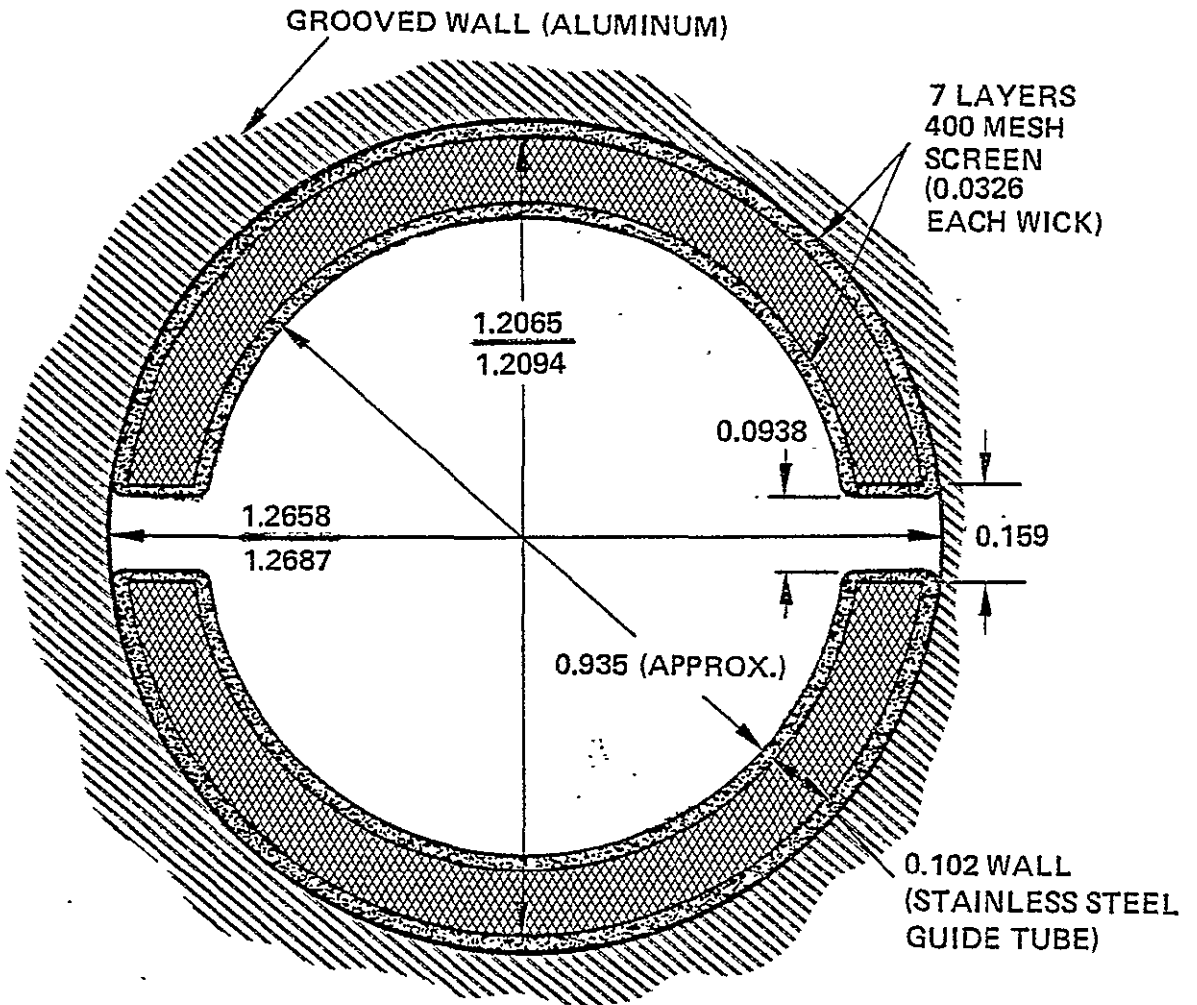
SECTIONAL VIEW OF INVERTED MENISCUS HEAT PIPE EVAPORATOR SHOWING DETAILS OF CIRCUMFERENTIAL EVAPORATIVE TRANSPORT WICK. NOTE STAINLESS STEEL GUIDE TUBE FOR ACCURATELY PLACING CIRCUMFERENTIAL WICK IN CONTACT WITH GROOVED WALL. TOTAL HEAT TRANSFER AREA IS 15.2 CM<sup>2</sup>. ALL DIMENSIONS IN CM.
